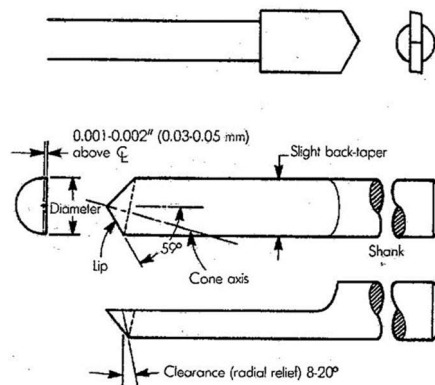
Flat drill used to produce holes in hardened steel, glass, and tile and half-round drill
